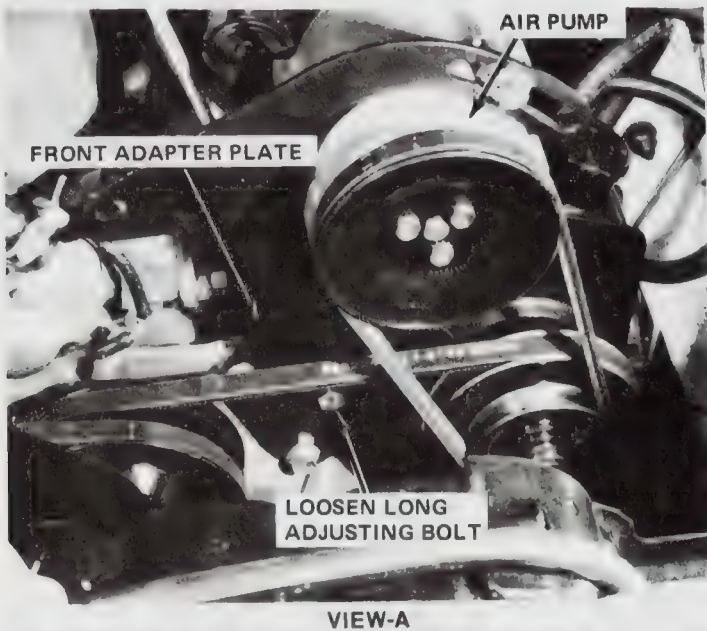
K-110 Adjustment Bolt Location—Six-Cylinder
